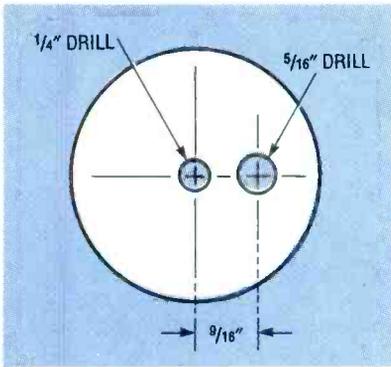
ANEMOMETER STATIONARY cap. Drill a 1/4-inch hole in the exact center of the top of a 1 1/2-inch PVC end cap. Drill a 5/16-inch hole offset 9/16-inch from the center of the top.
